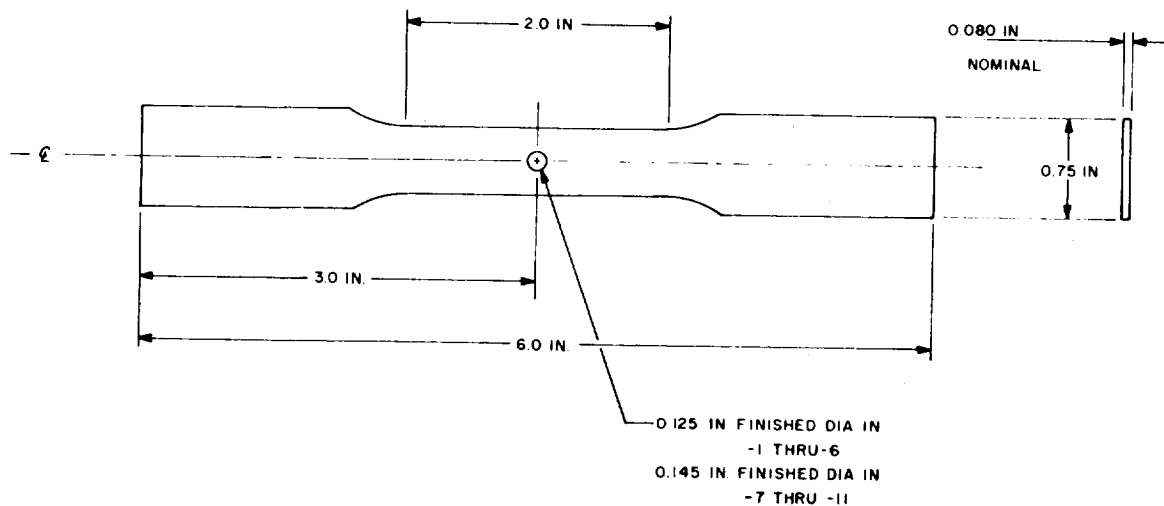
Standard Sheet Test Specimen Used in First Series of Tests⁵⁶
